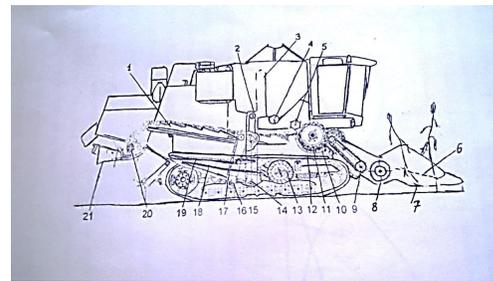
The grain combine harvester “Amur-Palesse” GS-812Ñ with a corn cutter: 1- straw rack; 2- grain elevator; 3- grain loading screw conveyor; 4- horizontal screw conveyor; 5- stripper beater; 6- feed chain; 7- cutting device; 8- screw conveyor; 9- feed elevator conveyor; 10- concave; 11- threshing drum; 12- shaker pan; 13- fan; 14- grain screw; 15- finish threshing device; 16- tailings screw conveyor; 17- tailings elevator; 18- lower sieve boot; 19- upper sieve boot; 20- straw clipper; 21- deflector hood.
